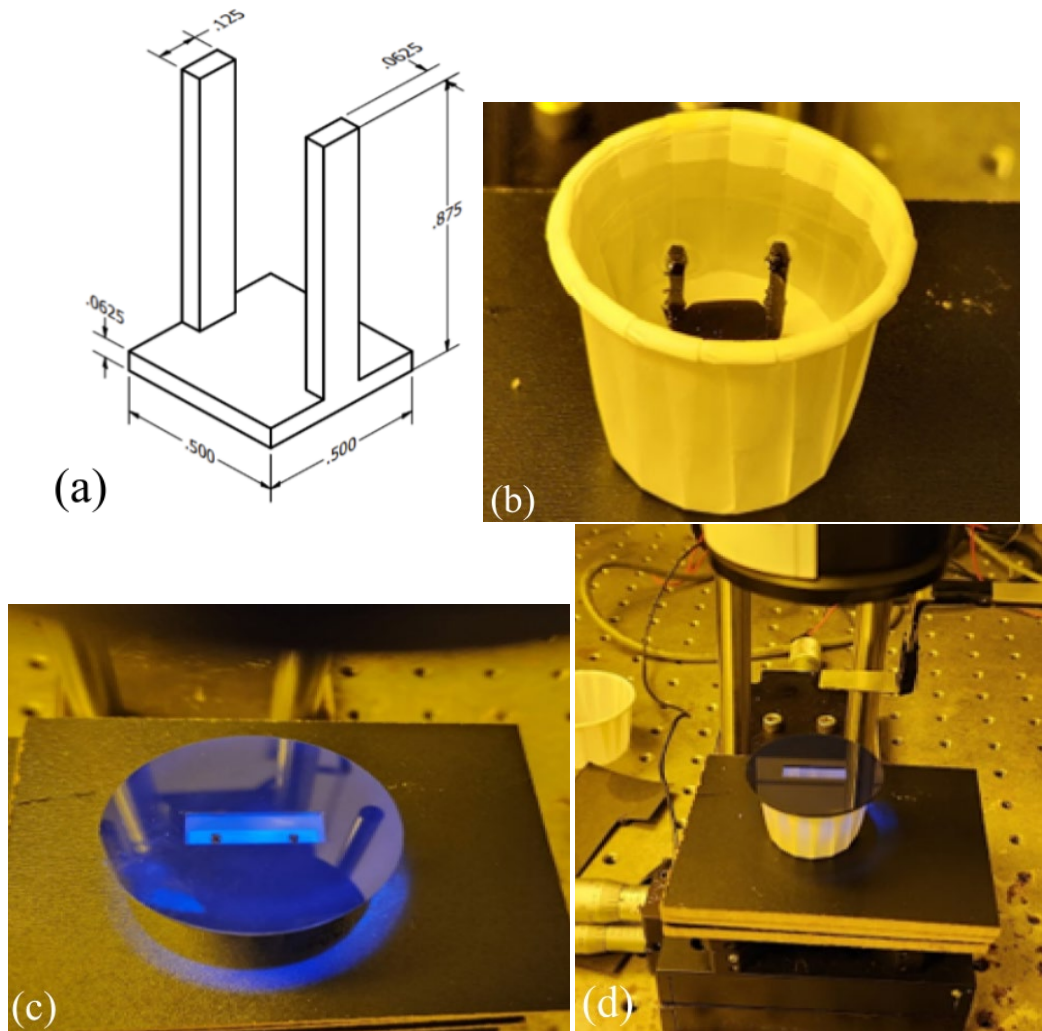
(a) 3D Printed Part Holder, (b) Souffle cup vat containing a 3D printed part submerged in saline support fluid and AnyCubic 405 nm clear resin, (c) profile of physical mask, (d) Photo of FISP experimental system
